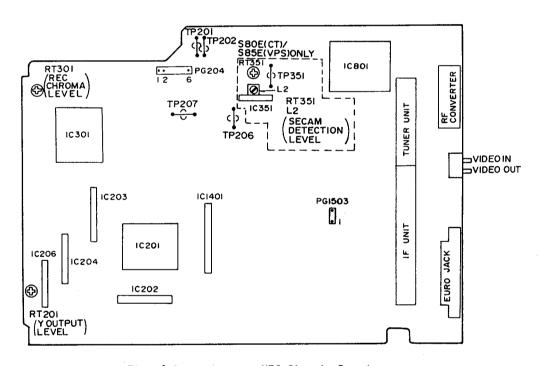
Components on YTJ Circuit Board (Solder Side)
